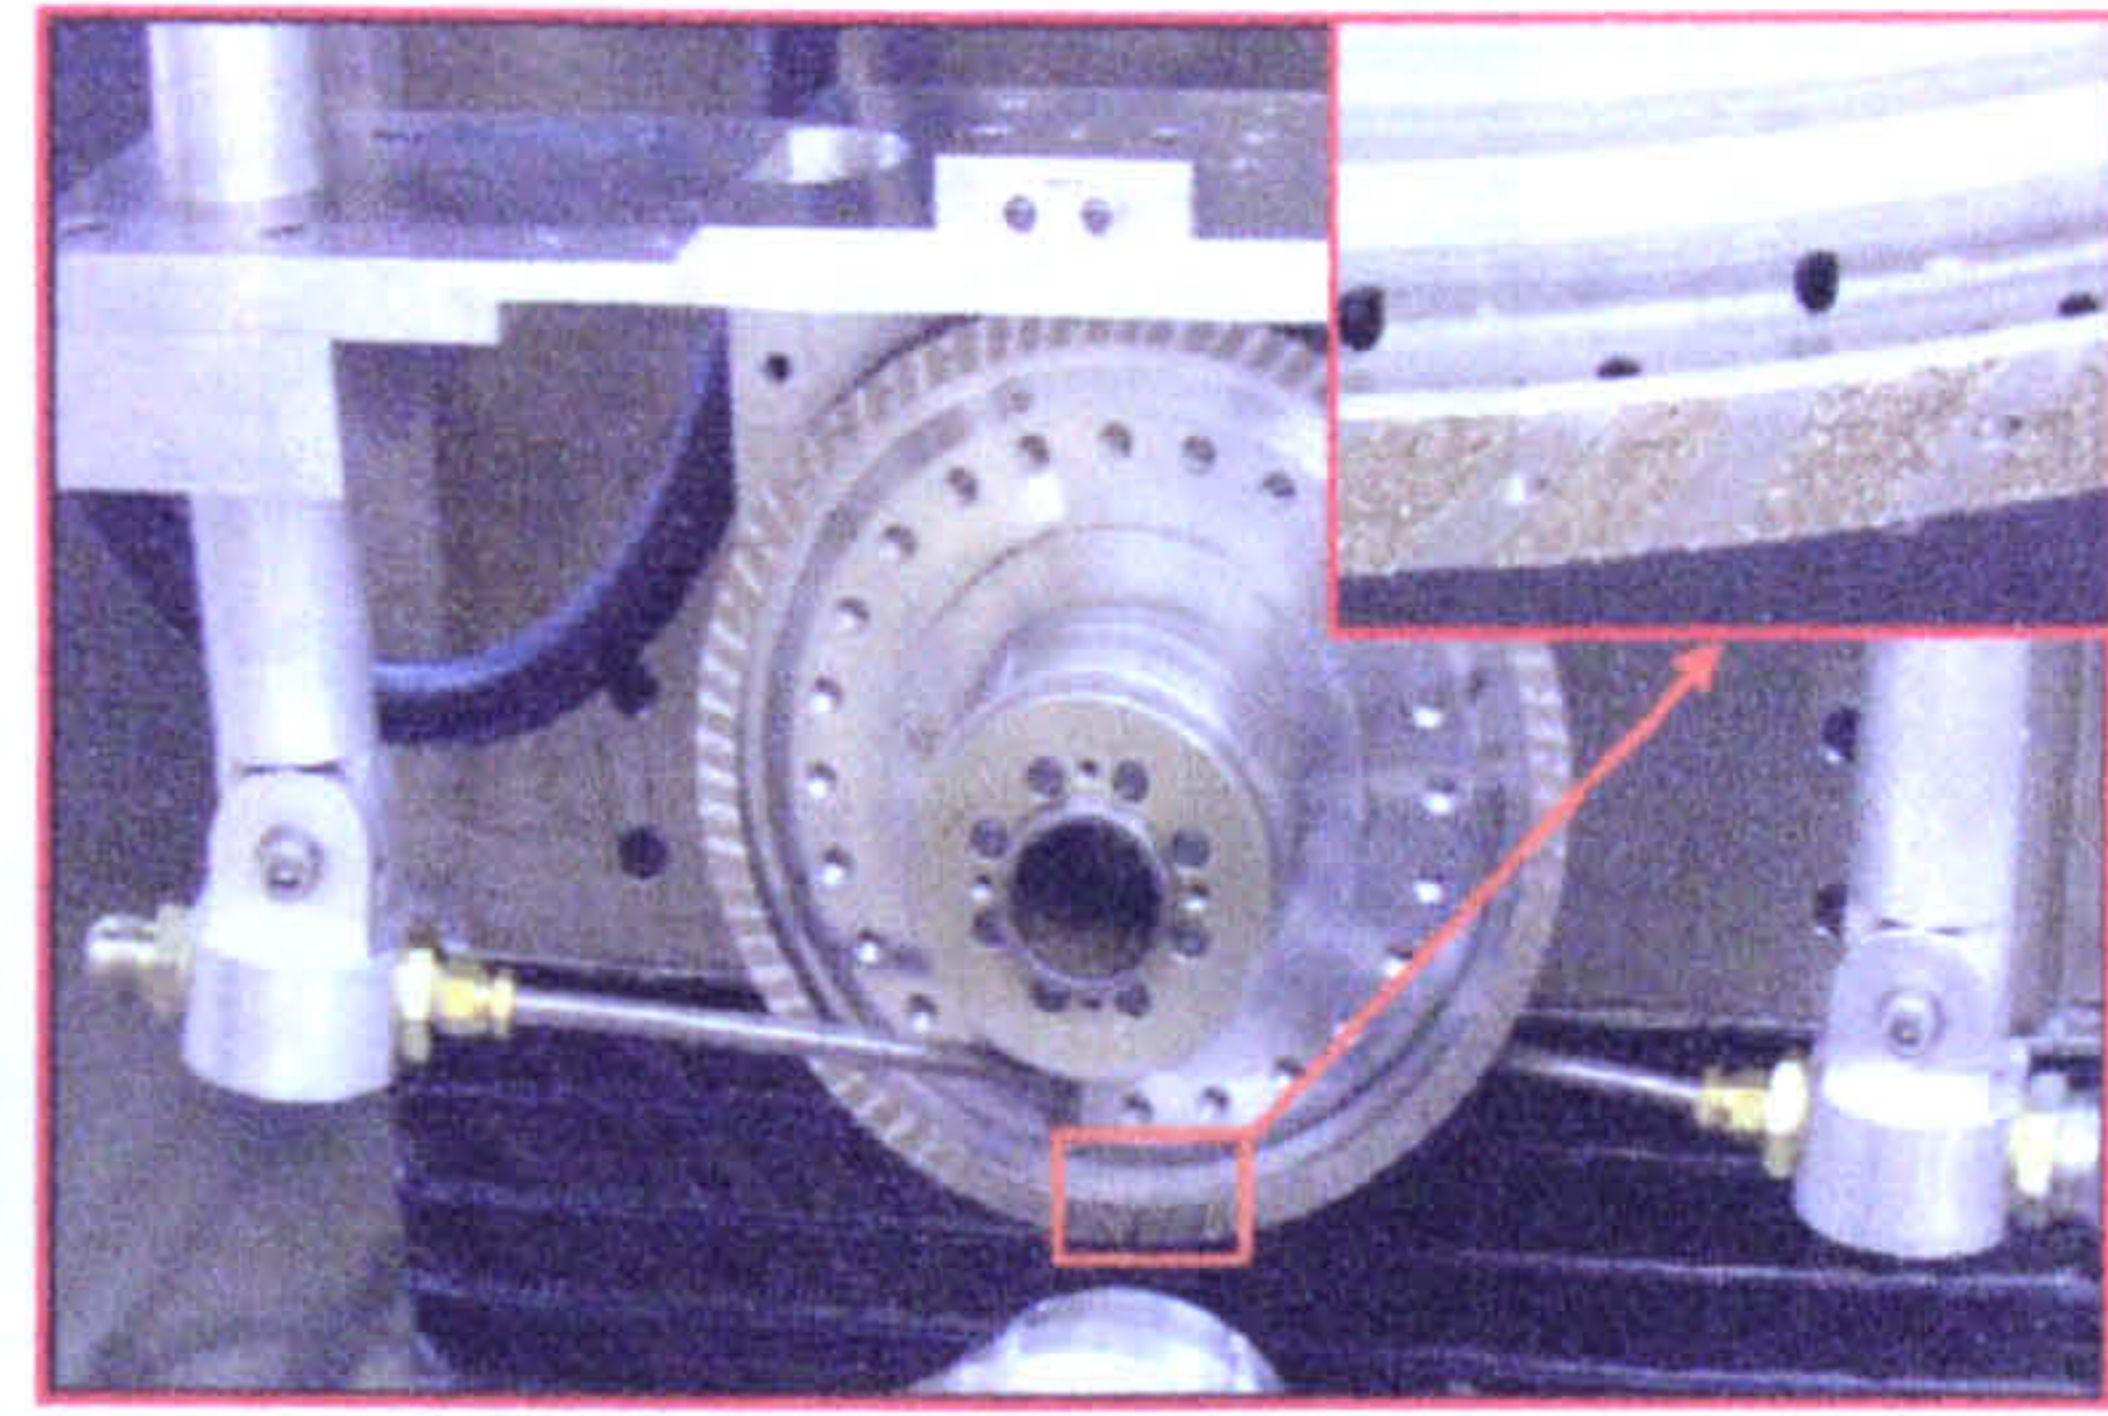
Set-up for Modified Segmented Grinding Wheel
